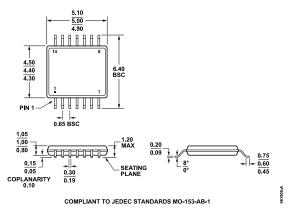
14-Lead Thin Shrink Small Outline Package [TSSOP]
